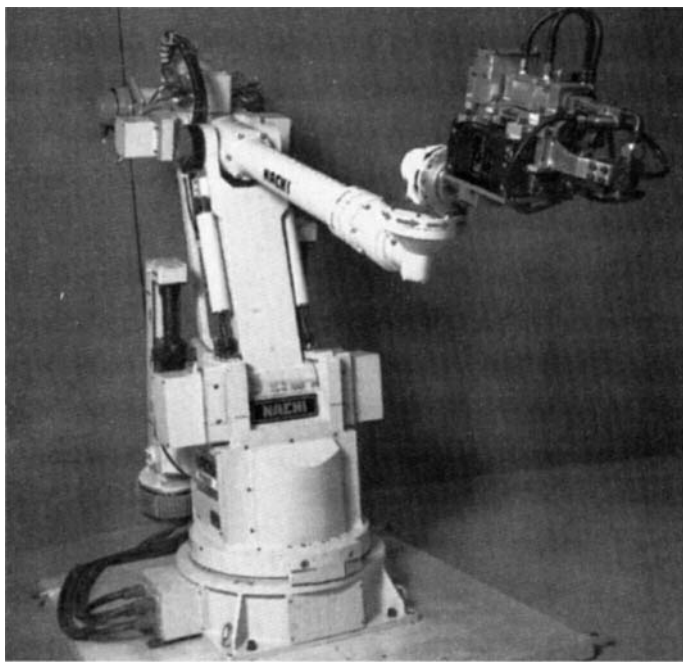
Heavy-duty industrial robot equipped for spot welding. This is called the NACHI Robot 8000 Series. [C. Itoh & Co. (America).]
